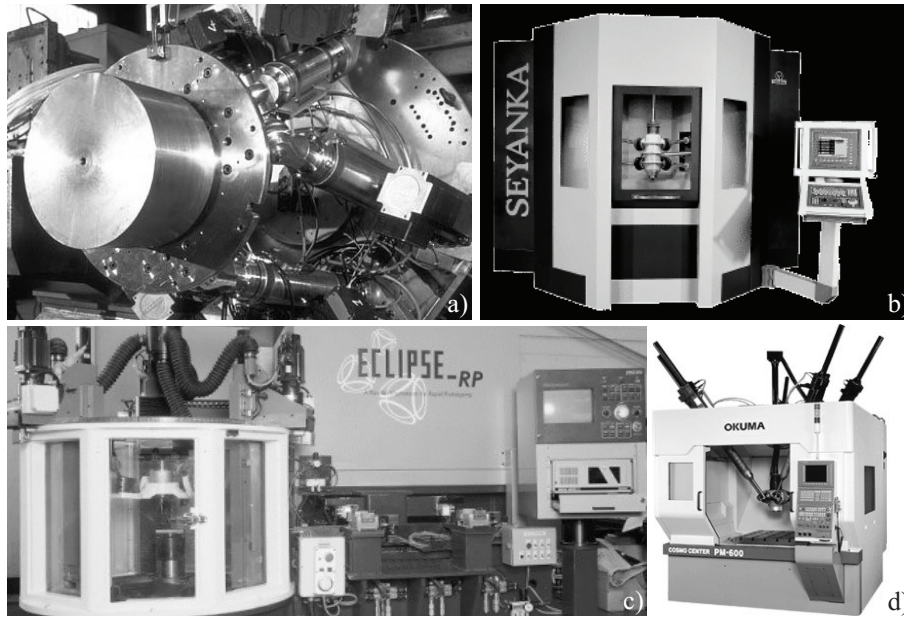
Other six-axis PKM machining centers. a) HEXAPODE CMW 300 (CMW), b) SEYANKA (Tekniker), c) Eclipse-RP (Daeyoung Machinery), d) Cosmo Center PM-600 (Okuma). Video by clicking on the figure: Okuma PM-600 six-axis milling machine.
